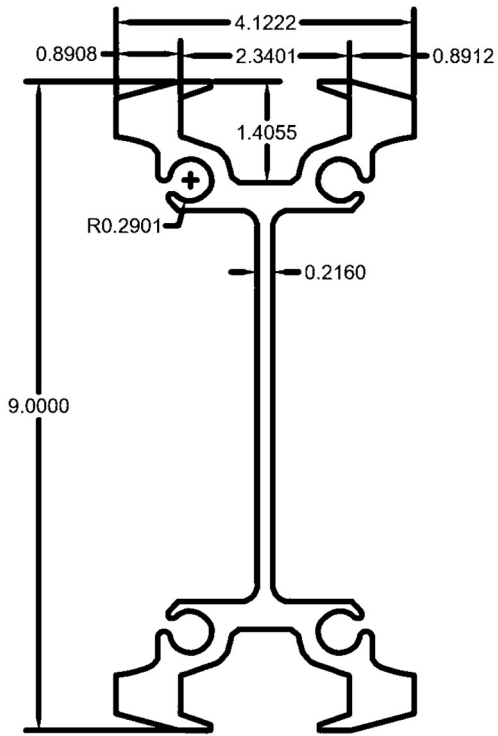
Cross-section of the framing members. Units are in inches.
